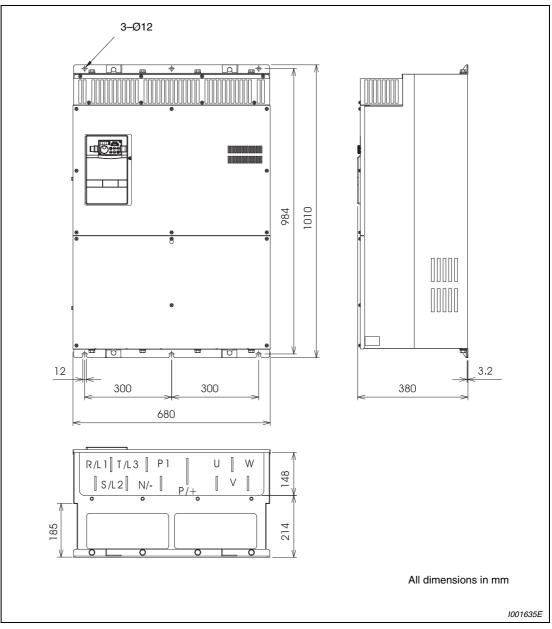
Dimensions of FR-A740-05470, FR-A740-006100 and FR-A740-06830
